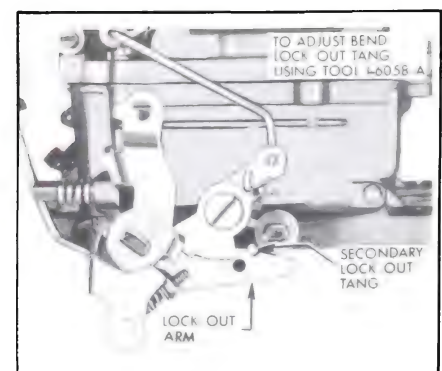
Secondary Throttle Lock-Out Adjustment
